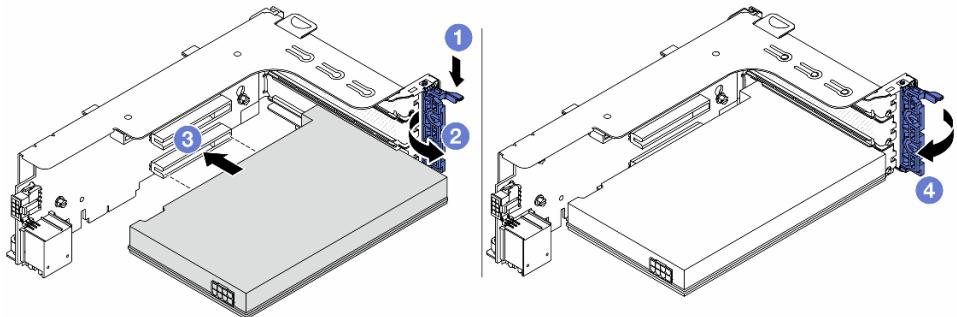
Installing a PCIe adapter to riser 1 cage or riser 2 cage
